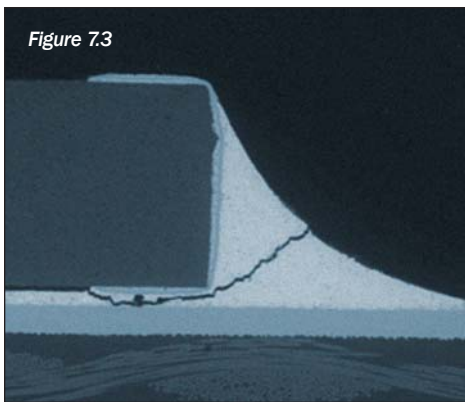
Vibration induced solder fillet failure. Courtesy CALCE, UMD.
